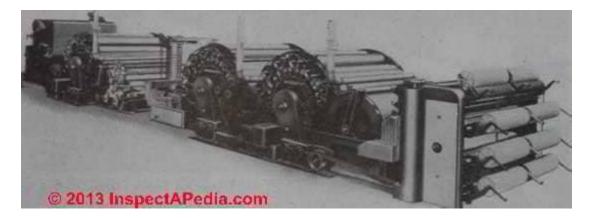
A line of up-to-date carding machinery. Courtesy Davis & Furber Machine Co.
